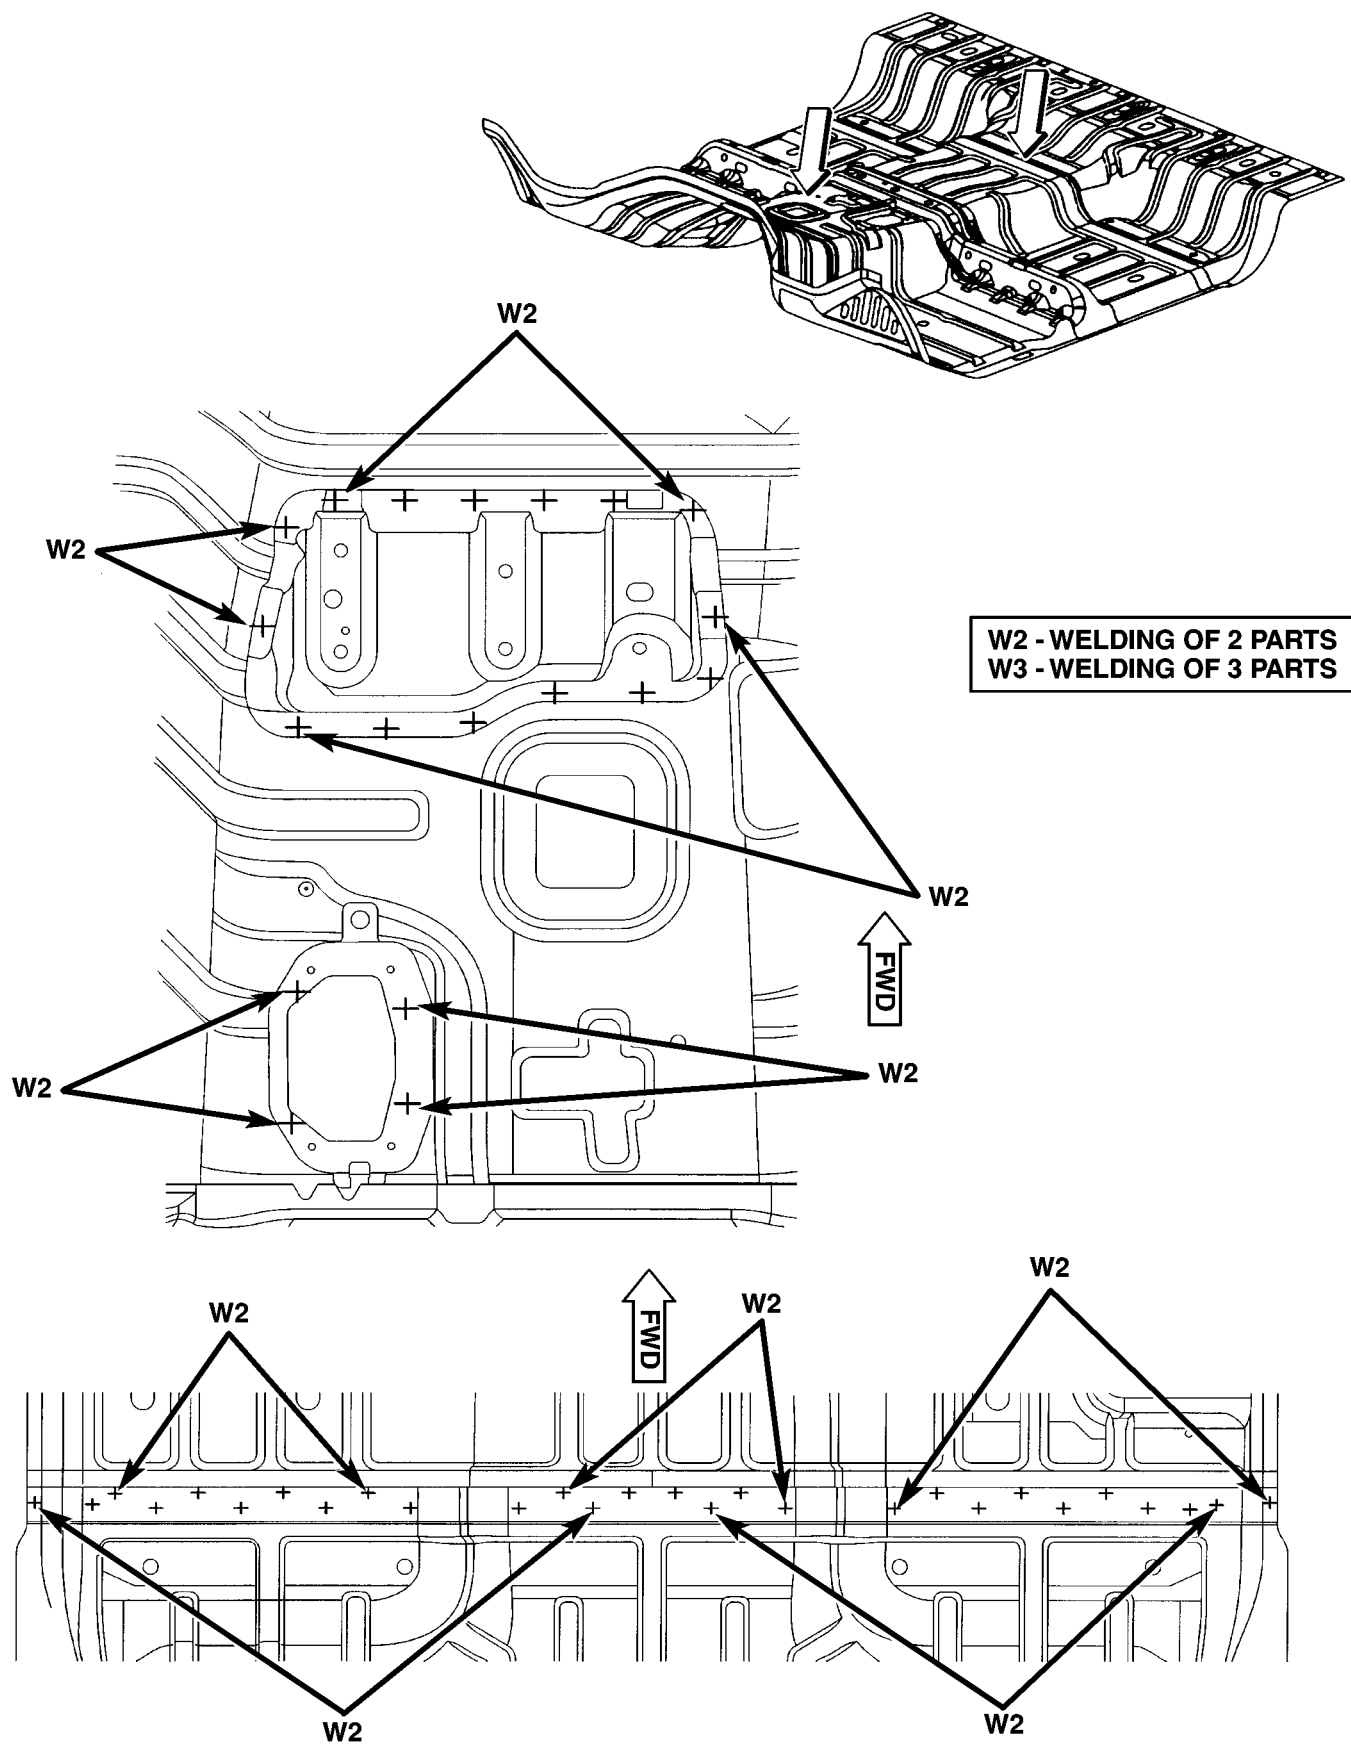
AIR BAG MODULE BRACKET - STANDARD CAB
